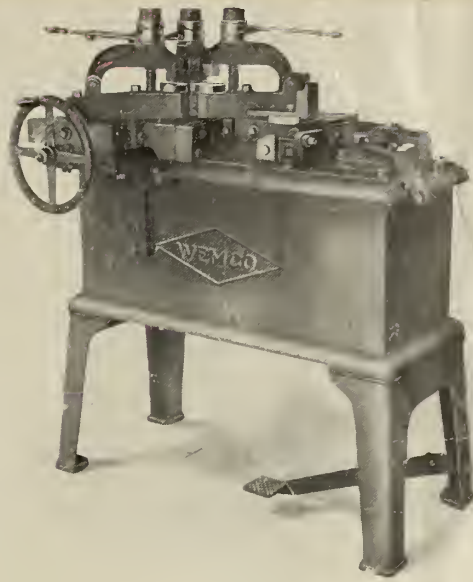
& 11 show cuts of the Wemco Welder manufactured by the Warren Electric Manufacturing Co. of Sandusky, Ohio. These are made in several sizes, to do all kinds of welding with unskilled operators. The following table taken from literature sent out by this company shows the power, time and energy required for welding different sizes of iron and steel rods.
